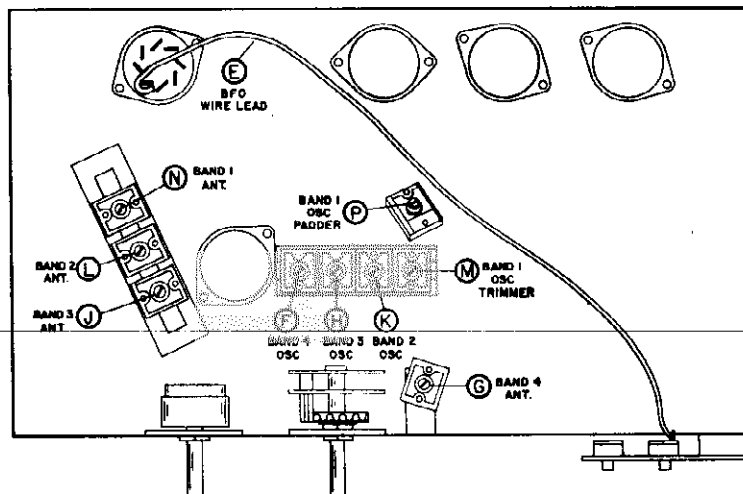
Bottom View of Chassis Showing Location of Alignment Adjustments
